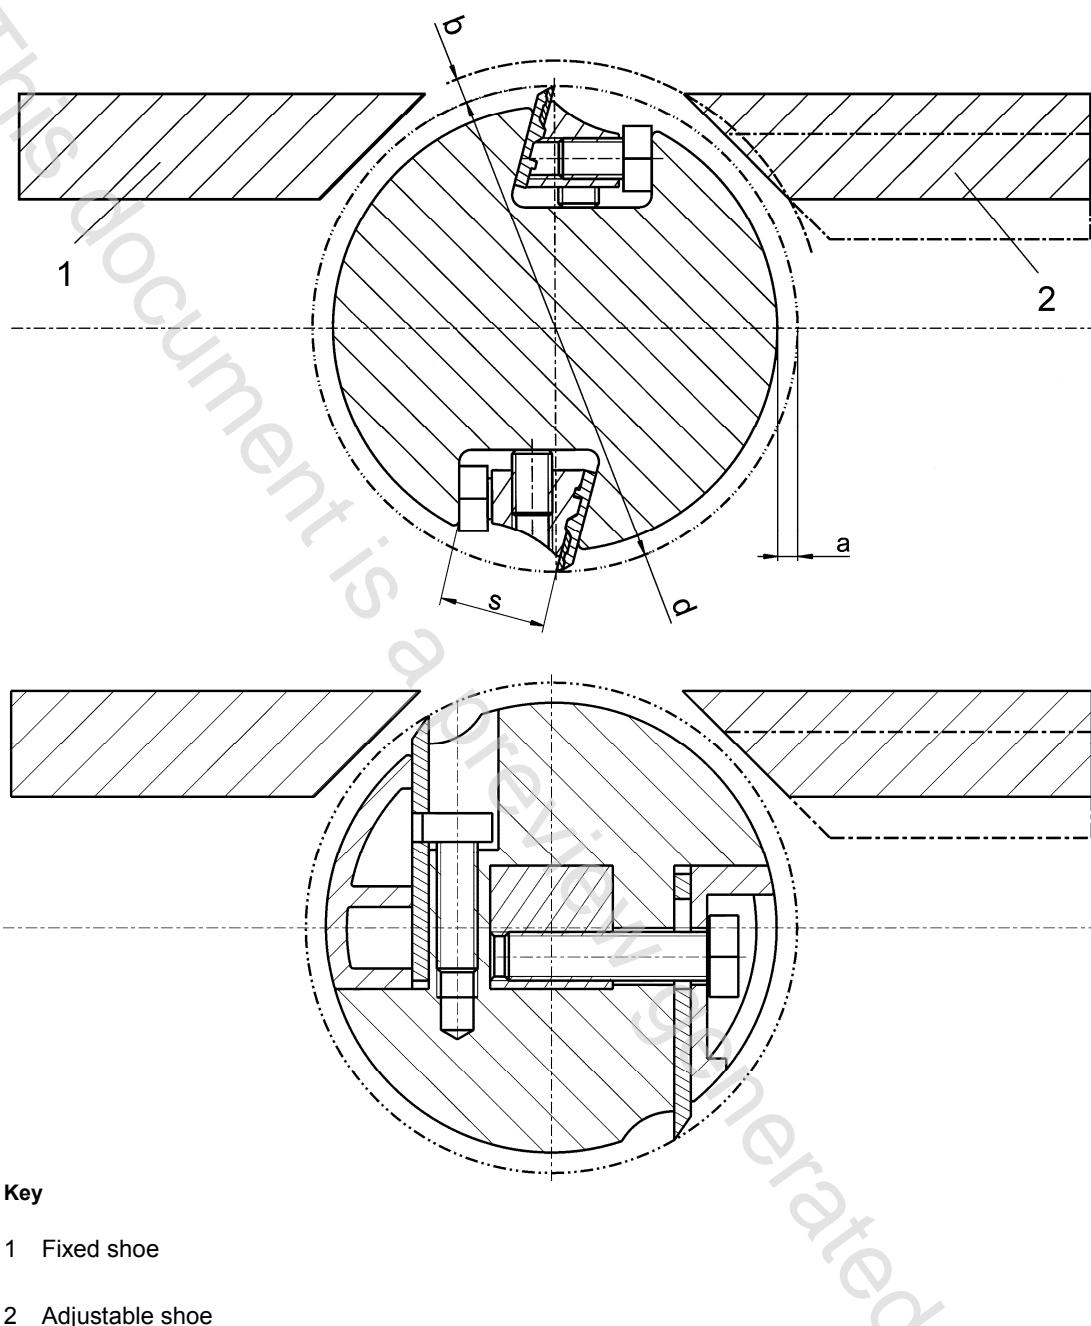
Examples of cutting heads with basic dimensions and clearance distances
